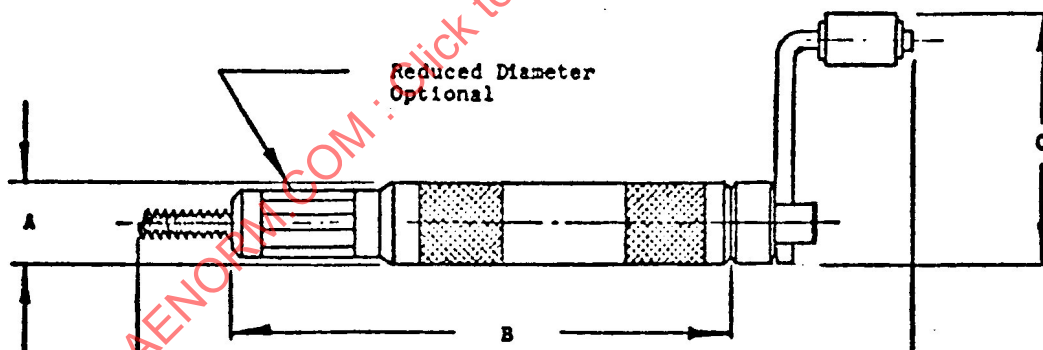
Type III, Class 1, Style a, prewinder inserting tool with threaded mandrel for 1/2 (0.500) and smaller unified coarse, unified fine sizes
